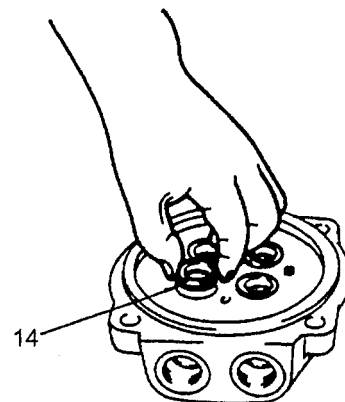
Removing bushing (14) and scrollwave (15)
